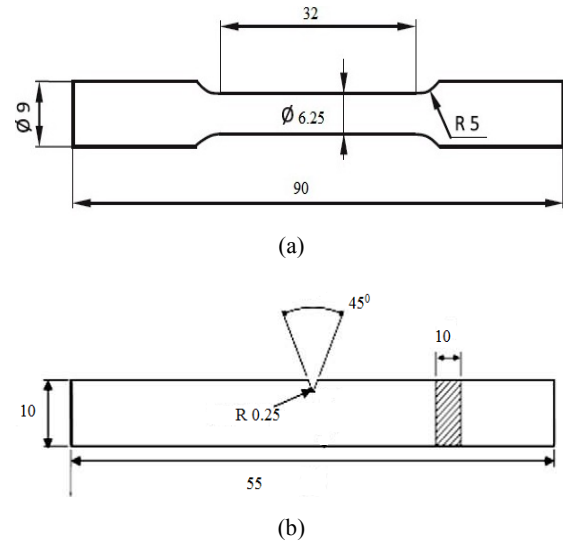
Test specimen, All dimensions are in mm (a) tensile test specimen (b) Charpy V- Notch Impact test specimen
